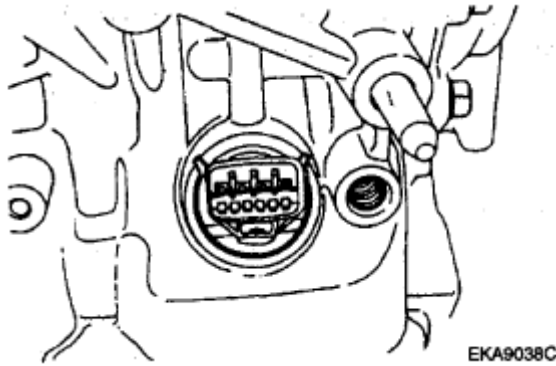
Measuring Resistance Between Terminal 7 Of ATM Solenoid Valve Harness Connector And Terminal 75 Of PCM/TCM Harness
